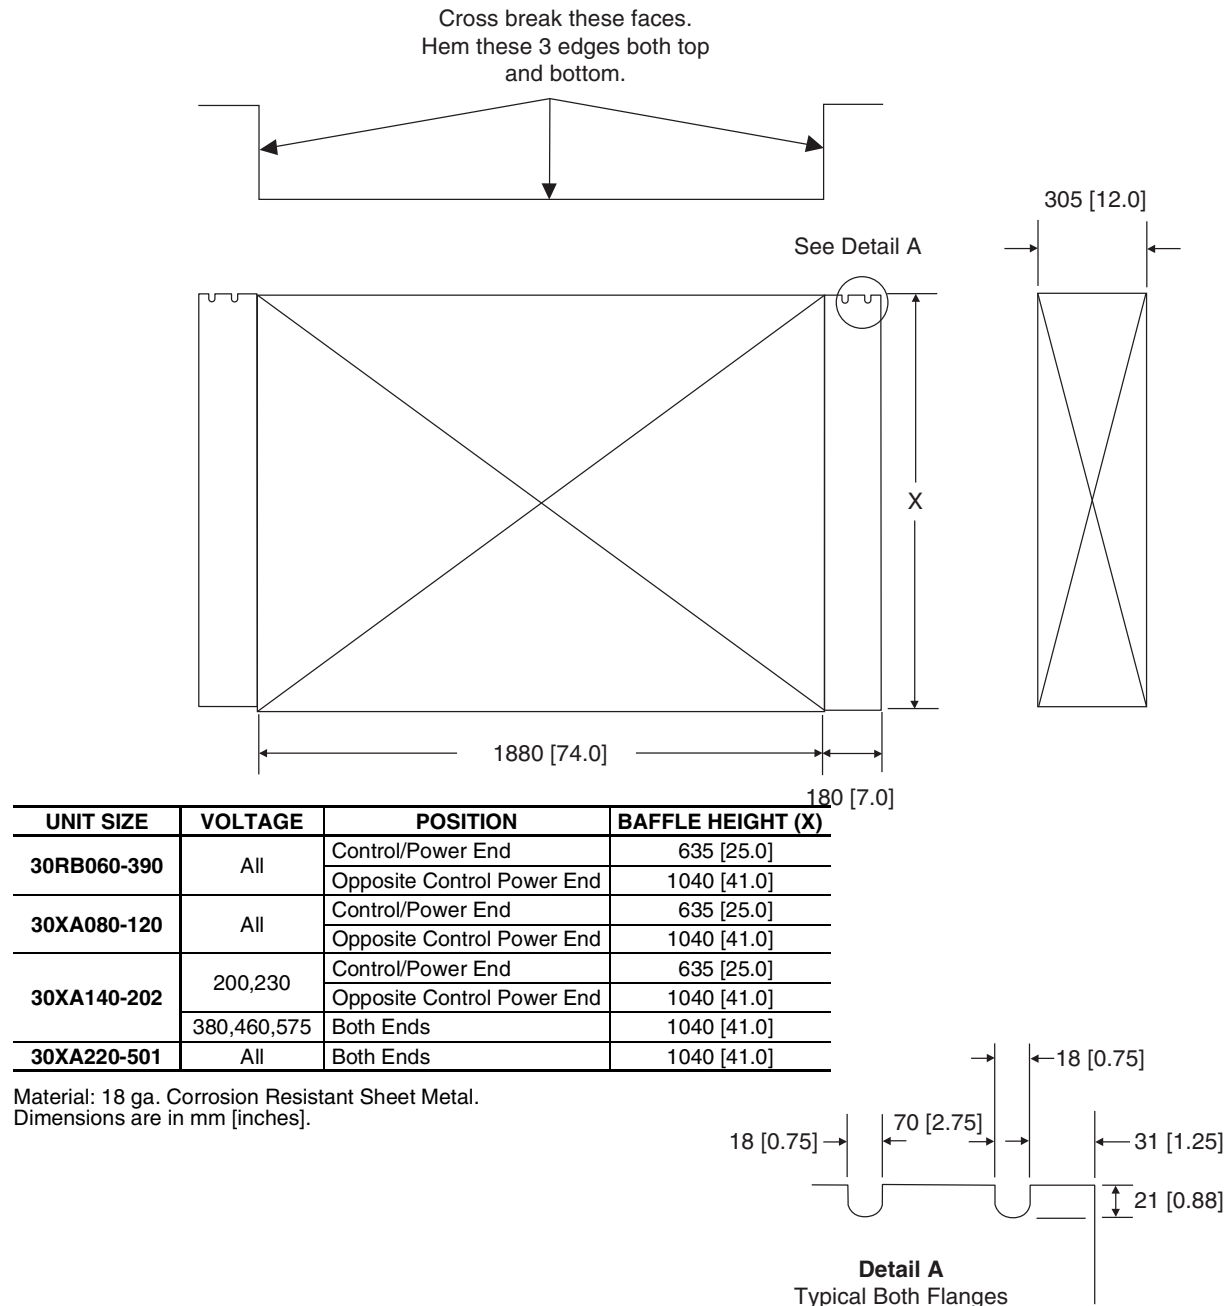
Field-Fabricated and Field-Installed Wind Baffles
